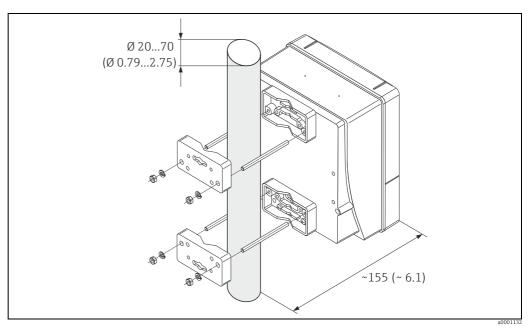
Pipe mounting (wall-mount housing). Engineering unit mm (inch)
